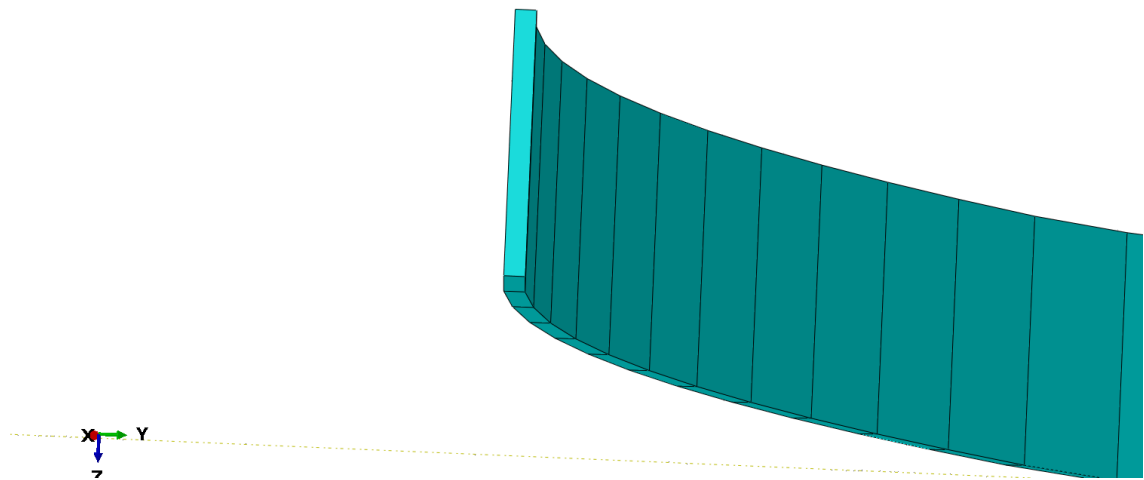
A close-up picture of the model B's gasket model and its meshing.
